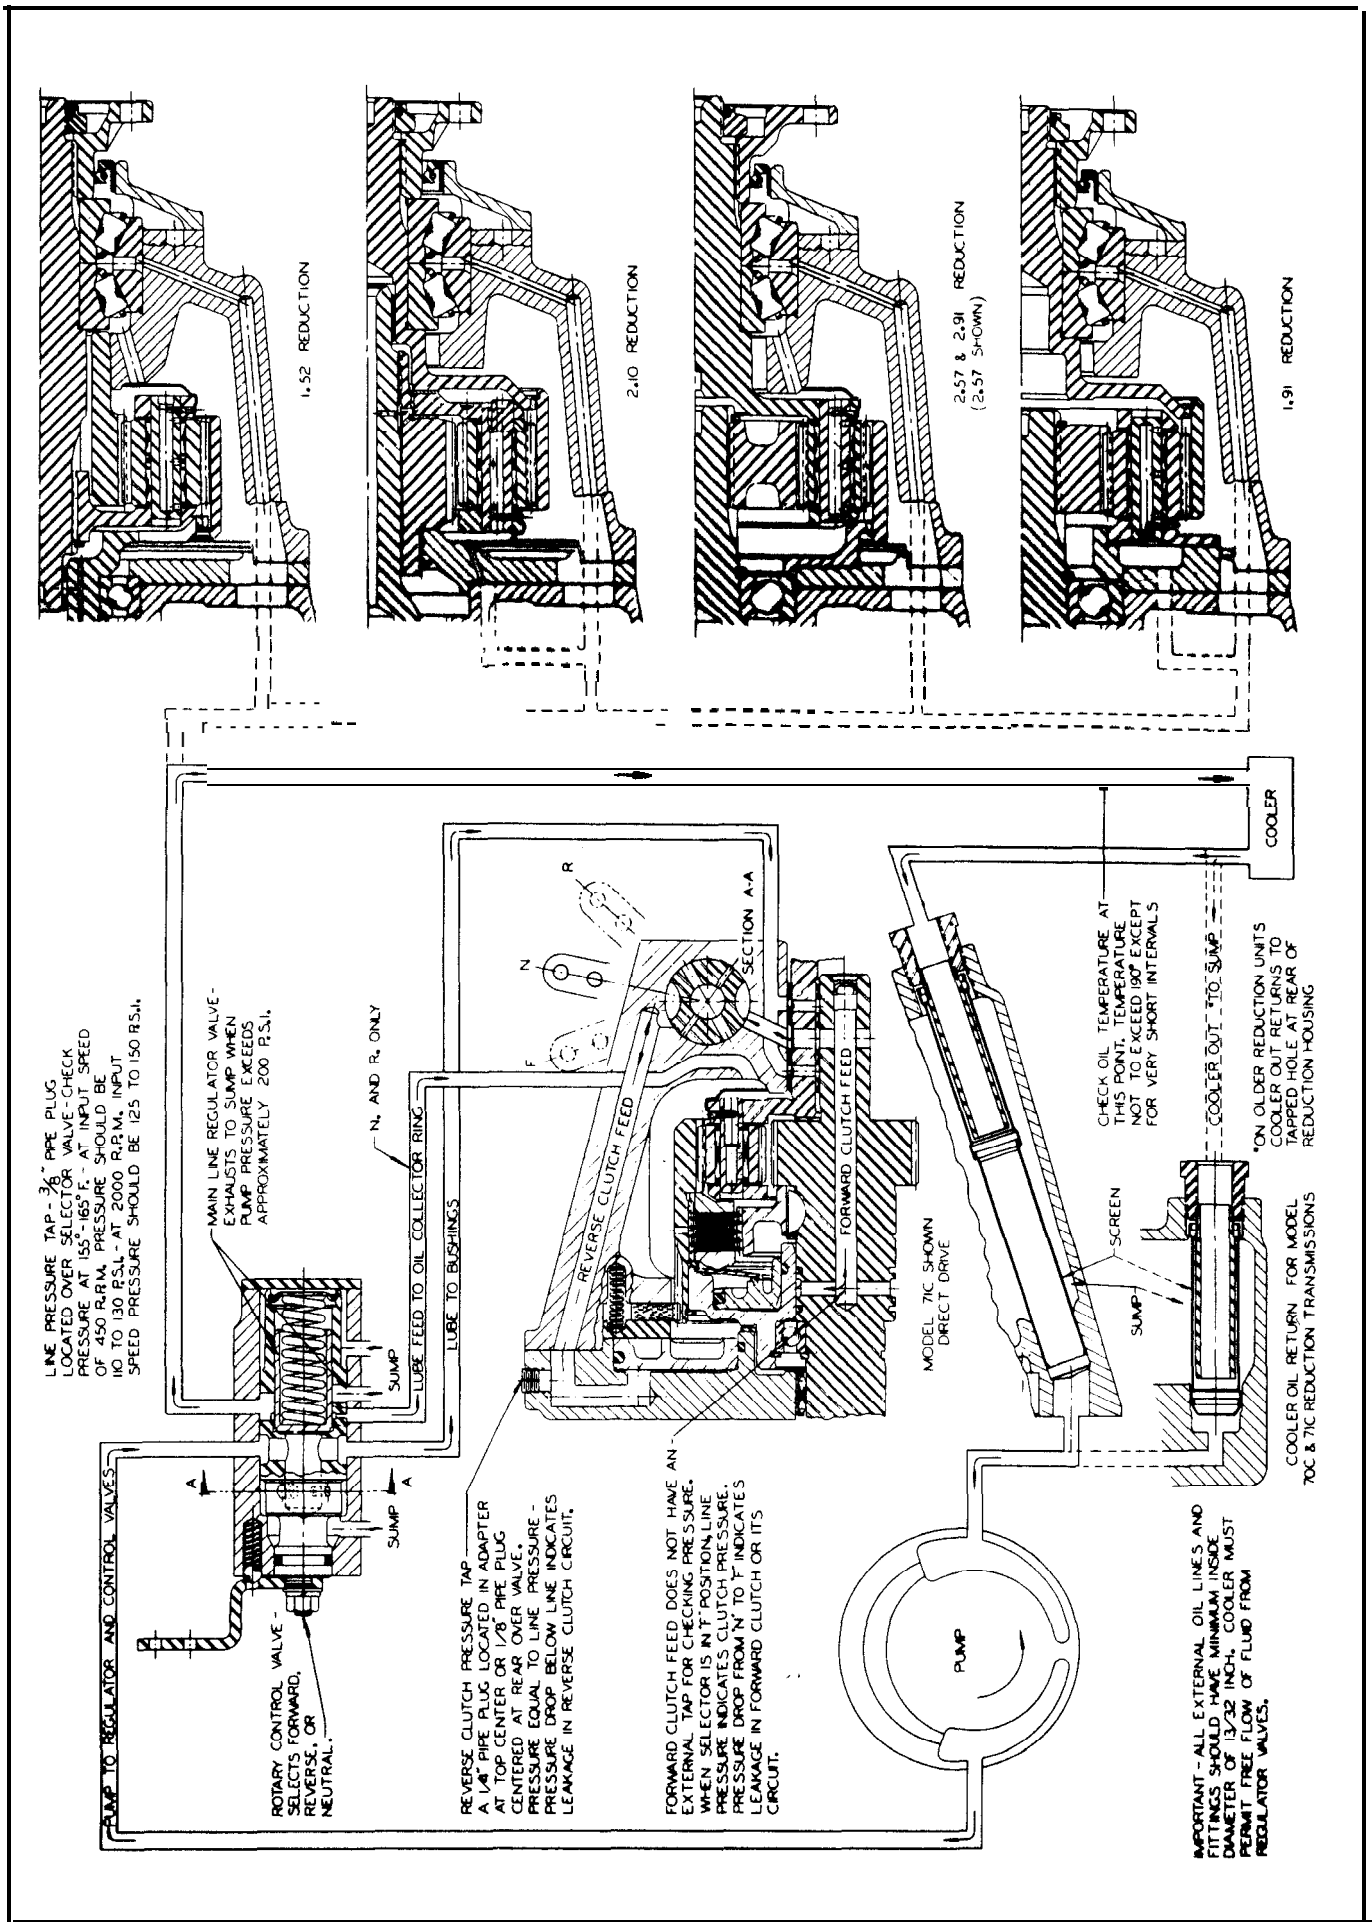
70C & 71C Transmission Hydraulic Circuit Diagram
